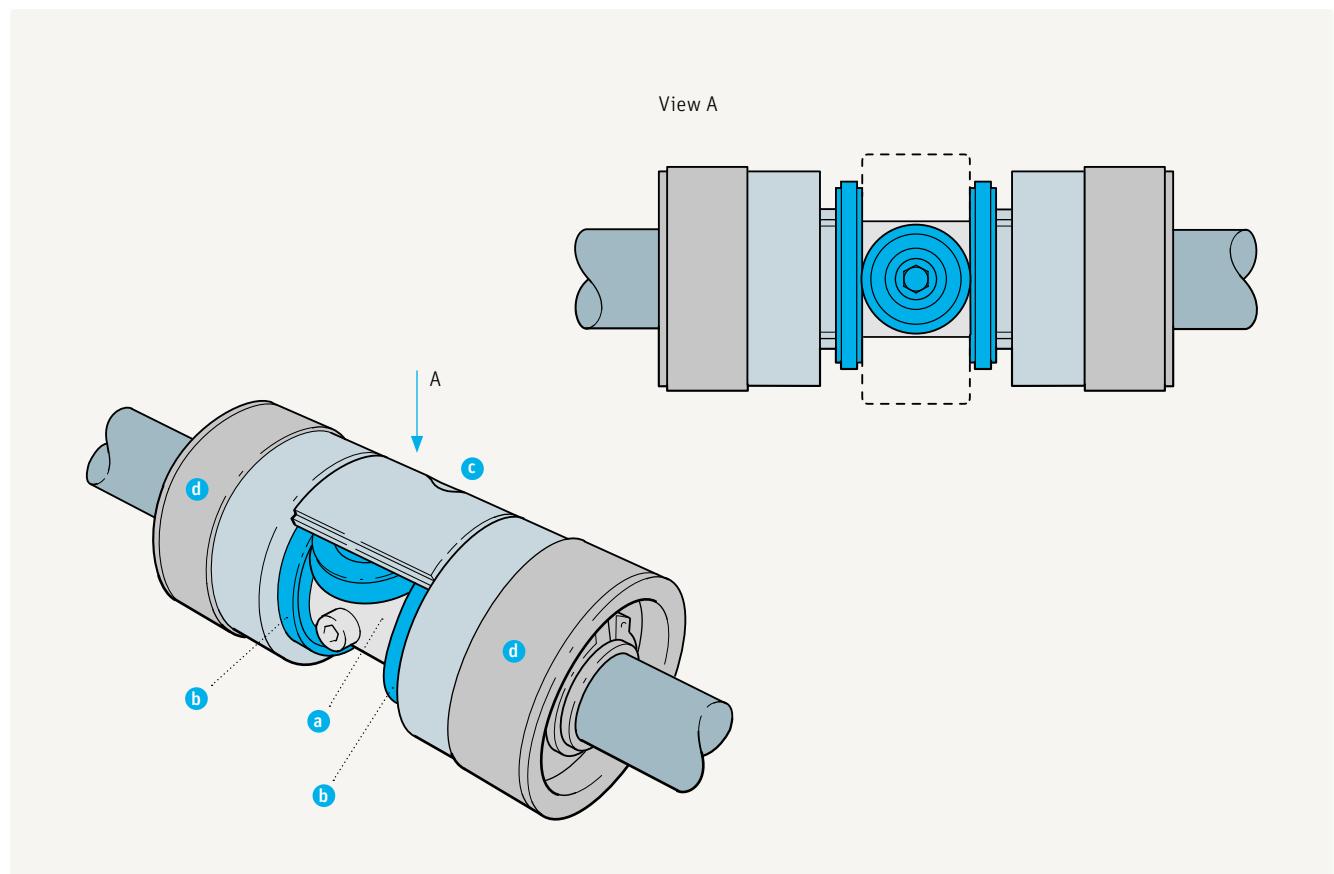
Three-part winding cylinder with powered middle section (a), two powered side sections (b), wheel and disc differential gear (c) and friction coatings (d) for driving the package
